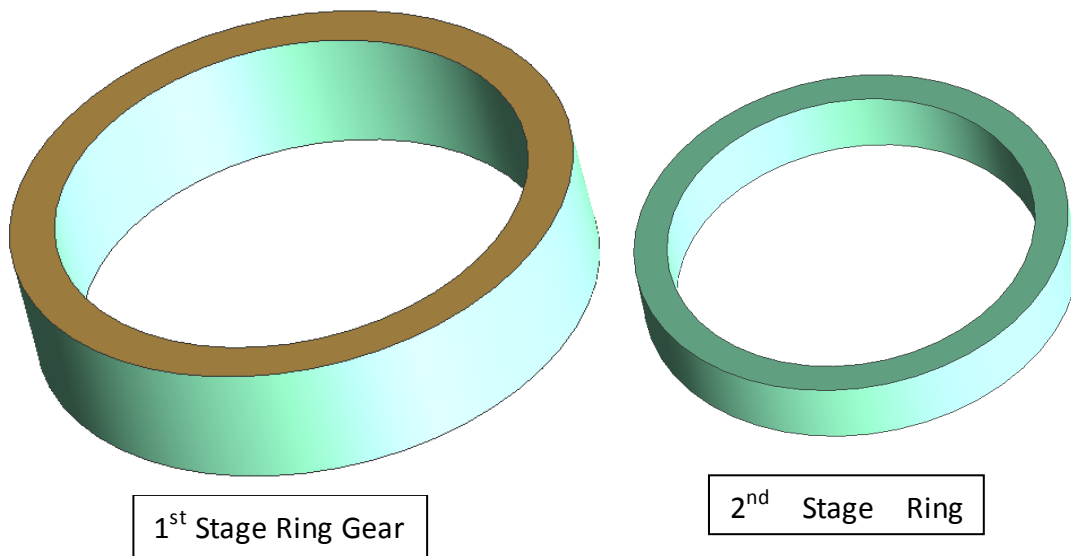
Simplified 1st and 2nd Stage Ring Gears
